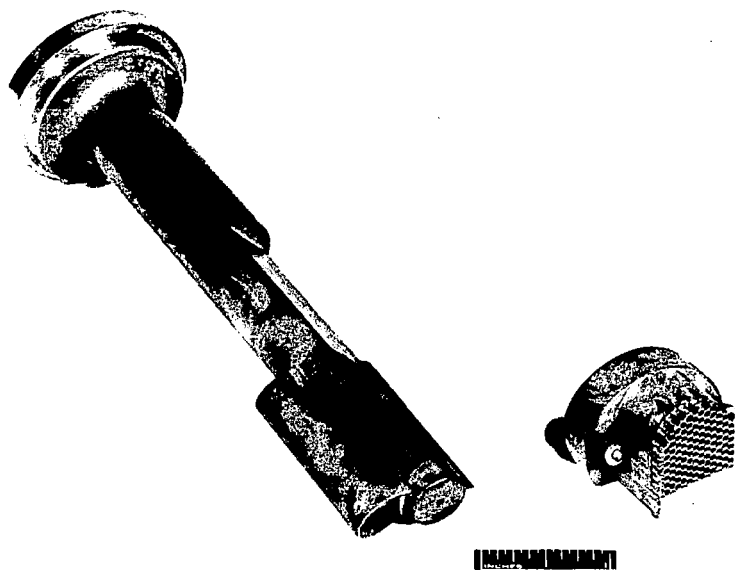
Stage 3 Removable Nozzle Vane and Tip Seal Insert After 405 Hr of Testing. (P69-9-25A)
